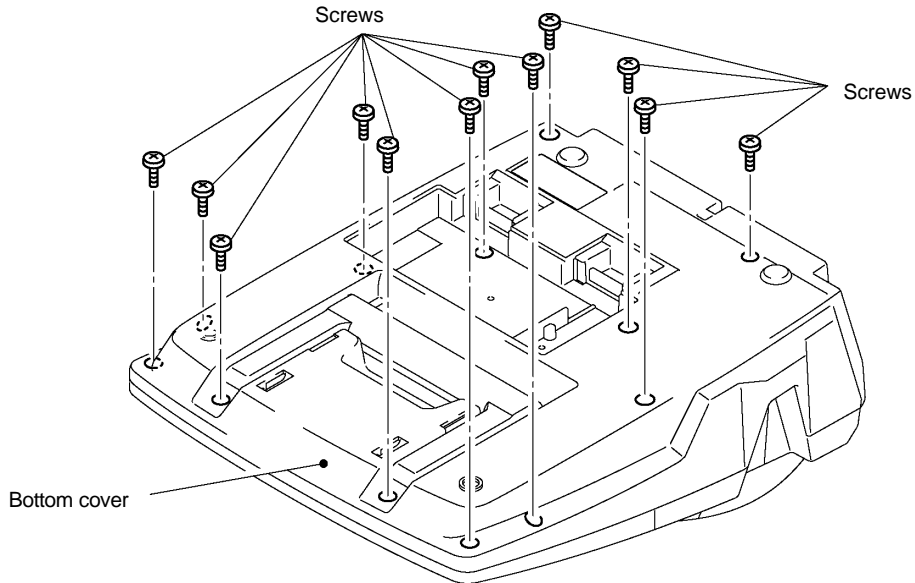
Reassembling the Bottom Cover (1)
